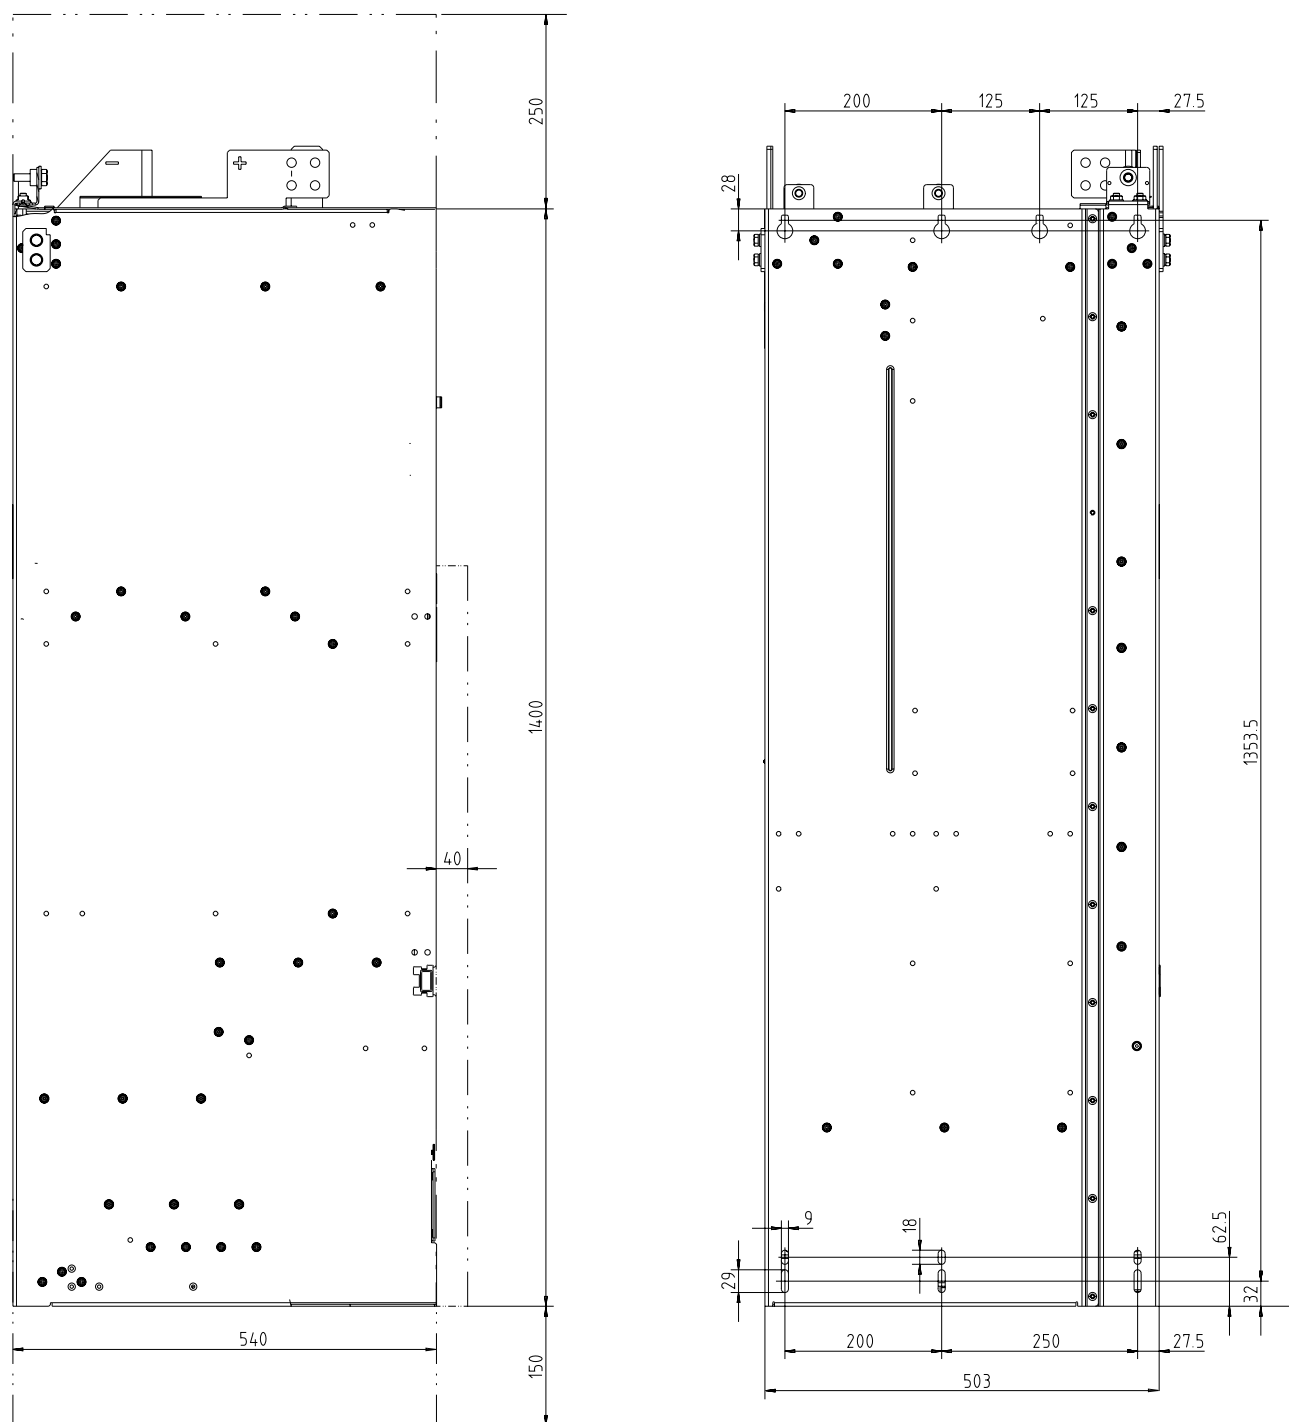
Dimension drawing Smart Line Module, frame size HX Side view, rear view
